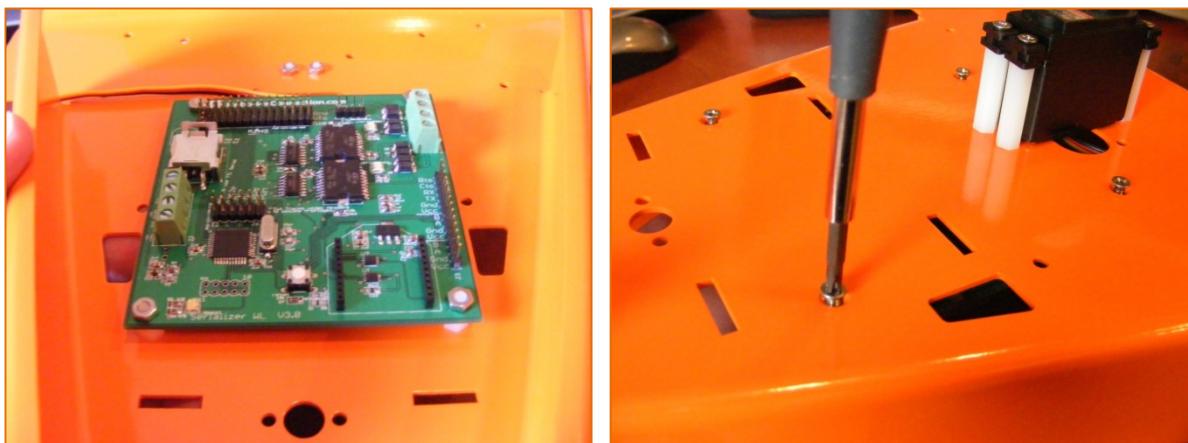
Installing Serializer with 4-40 x 1/4 Flat Head Phillips screws
